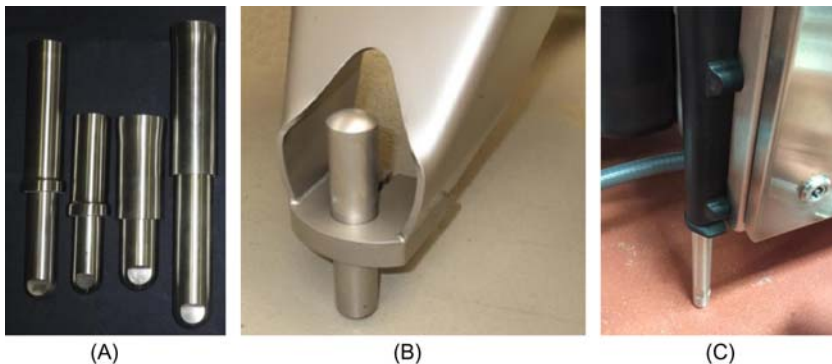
Ball feet with the threaded surface covered by an adjustable sleeve (A) and other foot designs without threads (B & C) provide easily cleanable designs. However, mechanically they will almost destroy the floor, because they exert a (very) high pressure locally, especially if they are used to support heavy equipment prone to vibration/oscillatory movement. Ball feet should only be used to support low-weight equipment. *Photo left, courtesy of Koss Industrial, Inc.
